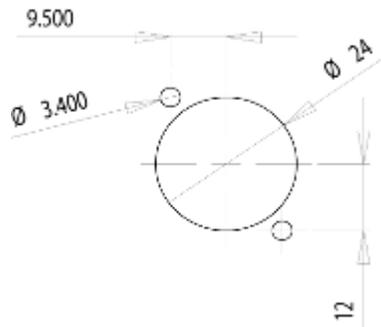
Dimensions [mm] of the remote USB port cut-out for wheelhouse console
